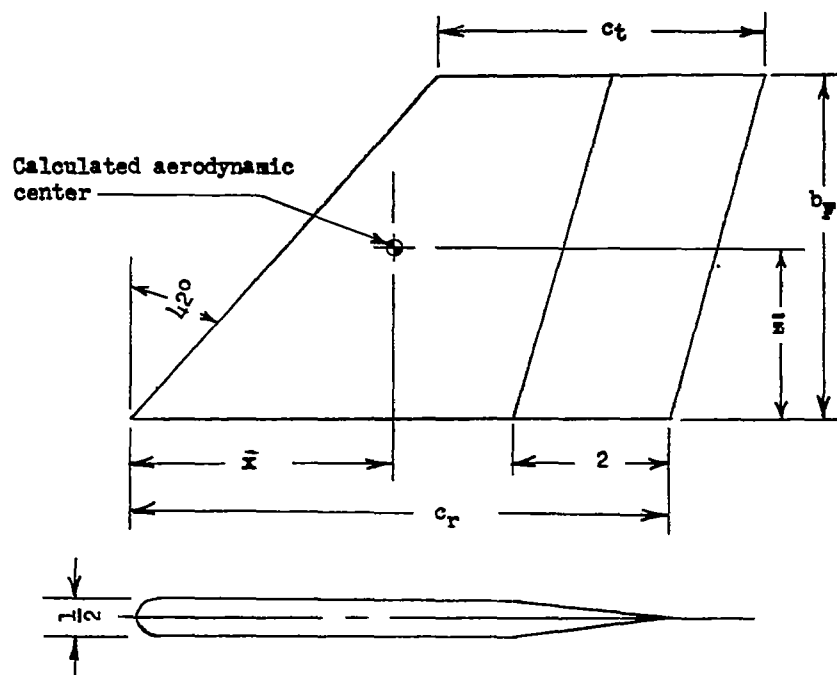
Drawing of model used in the investigation. All dimensions are in inches.
